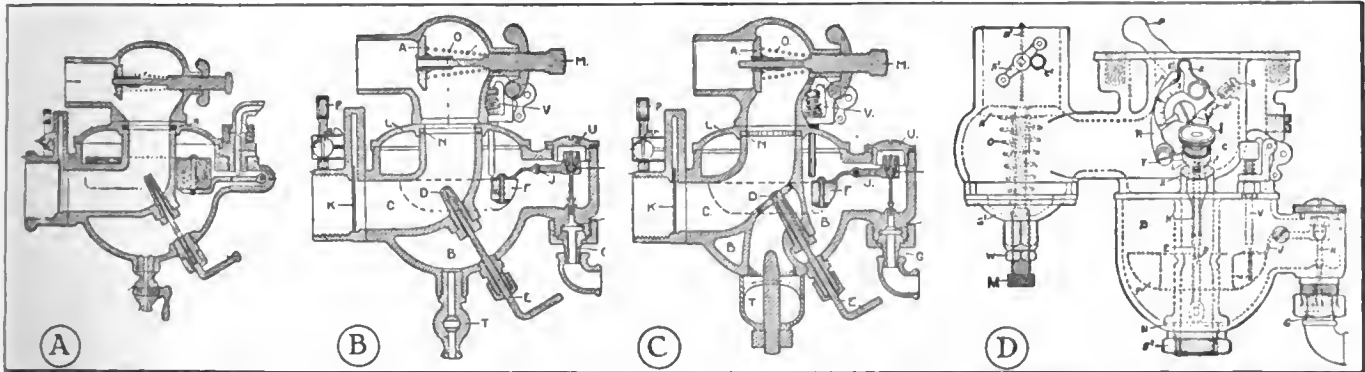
Sections of Schebler carbureters as made from year to year, showing a certain similarity in design, style and finish
